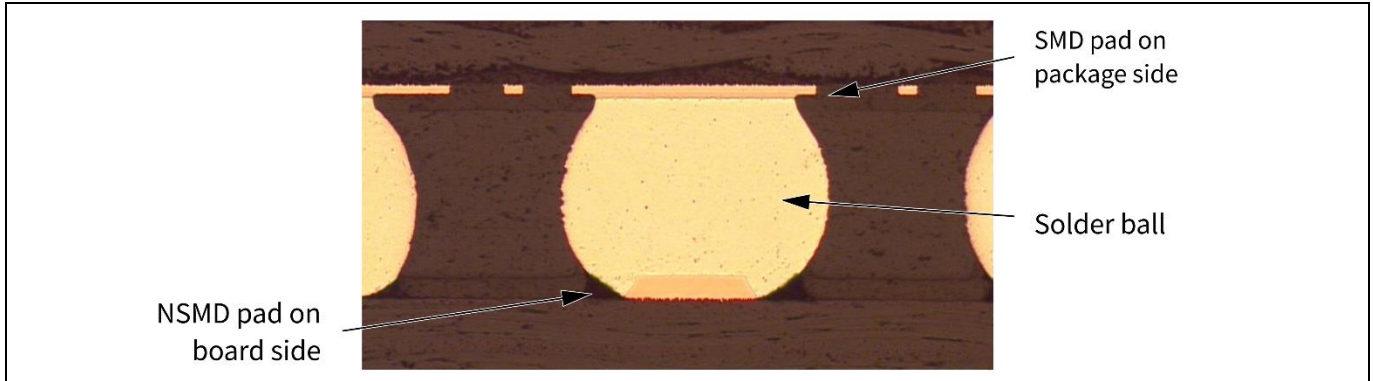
Cross-section of a BGA solder ball with SMD pad on the component side and NSMD pad on the board side. The latter allows the solder to “grip” the pad sidewalls increasing the board level reliability of the component.
